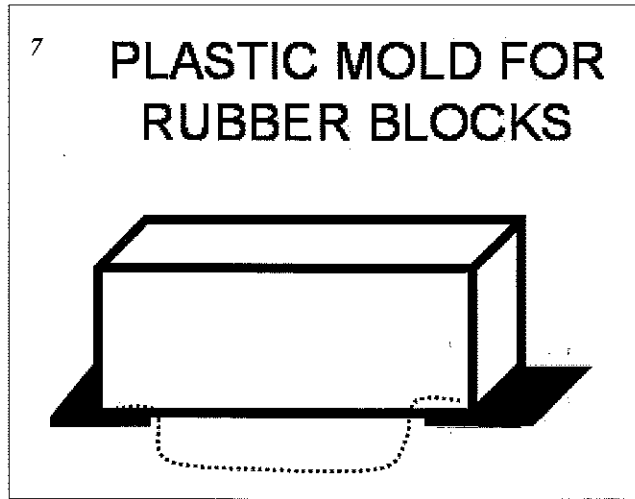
The four outer holes are tapped size 8-32 using a hand taper to ensure straight alignment and used to hold the aluminum workpiece onto a hardwood block. Small 1/4 inch nylon spacers elevate the block so the milling machine cutter will machine the entire outside edges. Shown here is a roughing bit that is designed to aggressively remove a lot of material before and during the milling operation. Photo 7: Sheet plastic is cut into strips and segments used to assemble the eight molds for the rubber blocks using Cyanoacrylate adhesive (super glue). Note the flat segment under each side that holds the metal cup and serves to suspend the mold.
